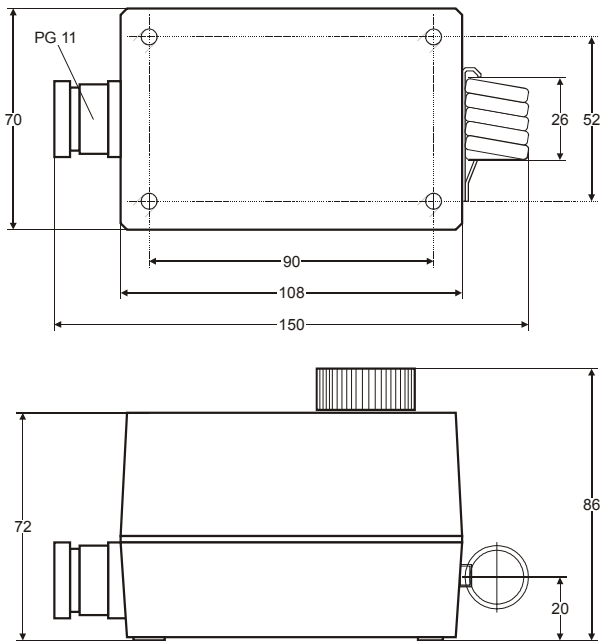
Dimensions T6120A1013/A1021/A1039 and T6120B1003 (in mm)
